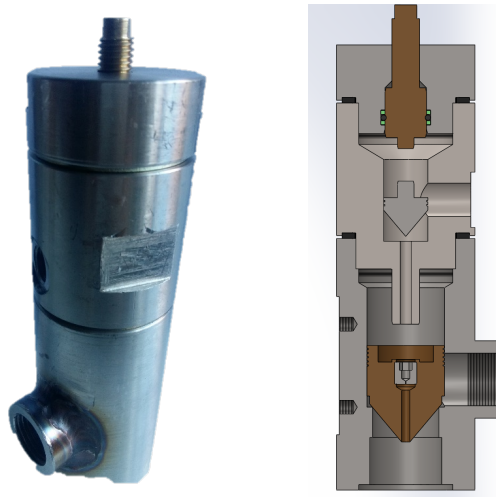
The first concept of WH pressure-relief valve: prototype (left), cross-section ($\Phi 50$ mm \times 175 mm) (right).
